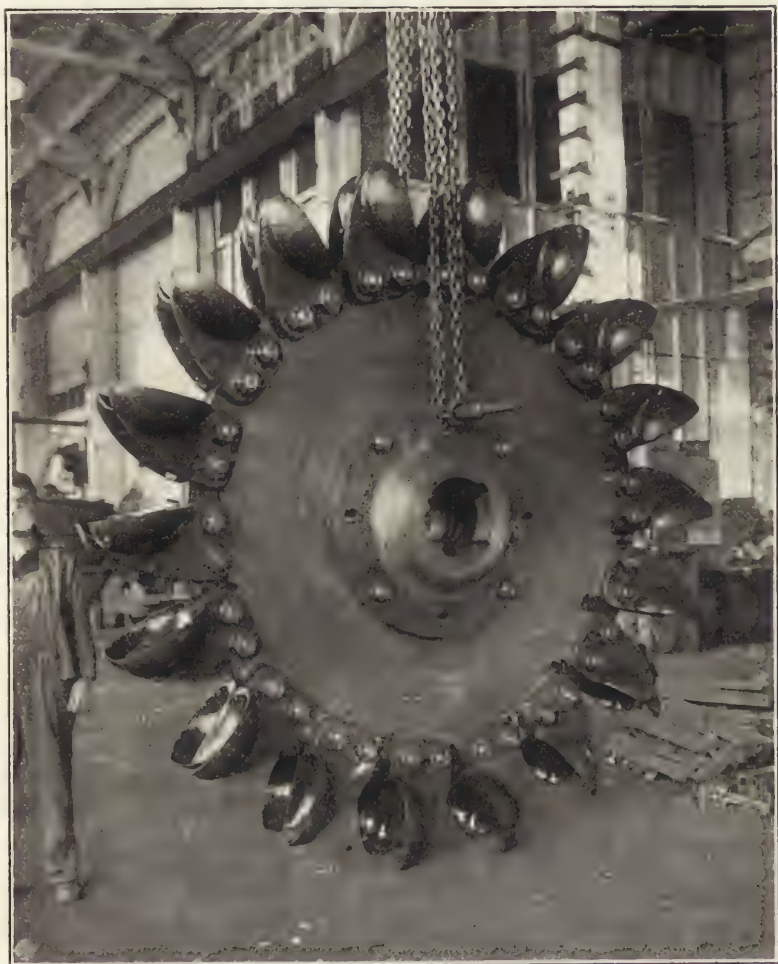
Wheel of Double Lug Construction, Puget Sound Power Company. Wheel center made from steel forging bolted to a wheel hub with follower plate. Develops 3750 hp. under 865 ft. (264 m.) effective head, at 225 r.p.m.
